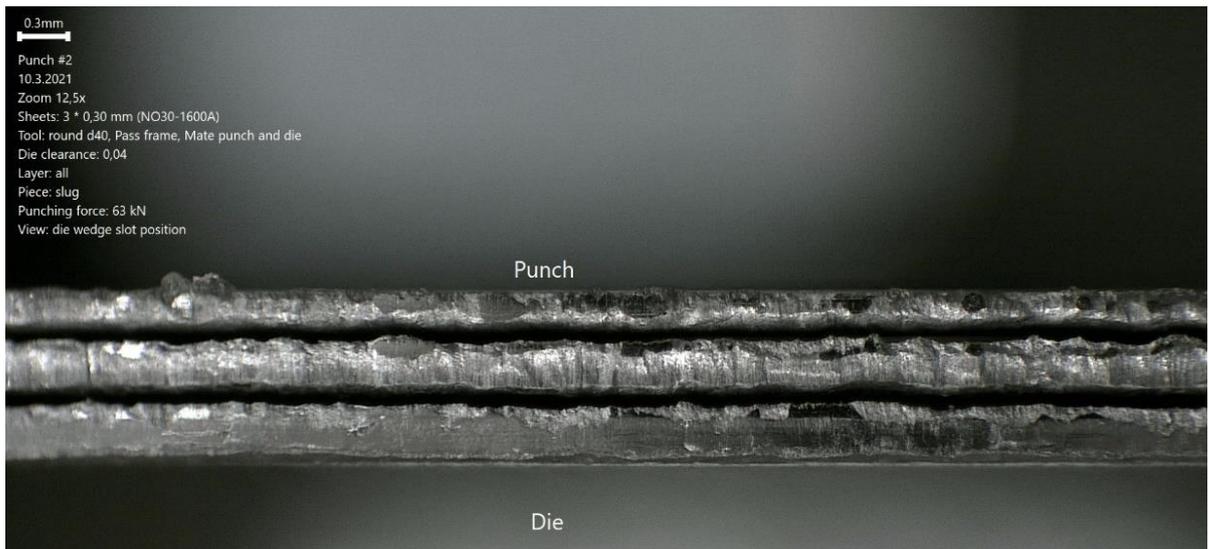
Stack of three NO30-1600A sheets, die clearance of 0.04 mm. Clean overall look, minimal burr height on the top layer. Also with this material, the top layer looks thinner than the other two. Cutting and fracture zones are divided similarly as with M270-35A material. Worth noticing that the bottom layer coating is not flaking.
